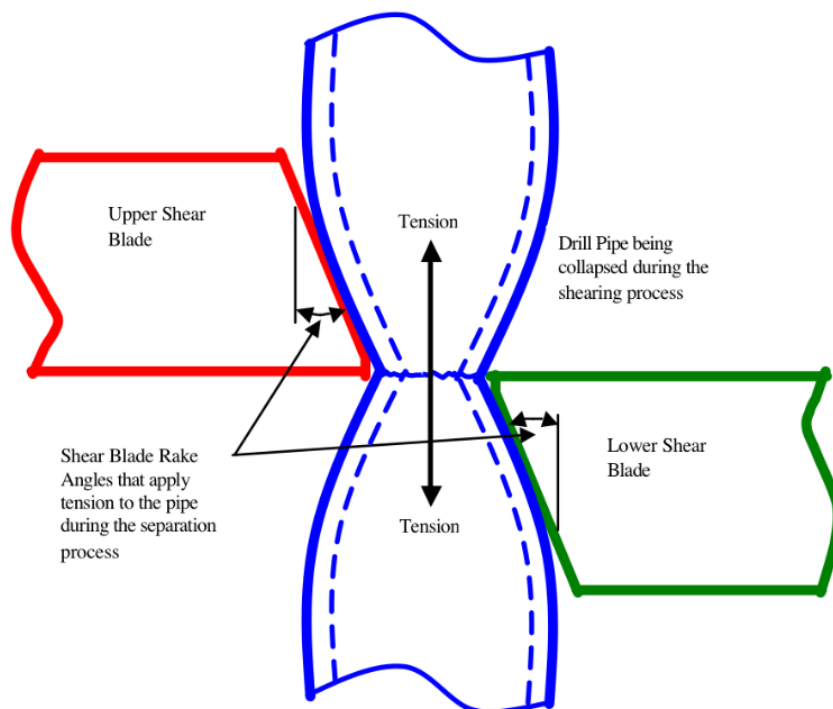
The Shear-ram cutting mechanism used for cutting standard drill pipe.(21)
